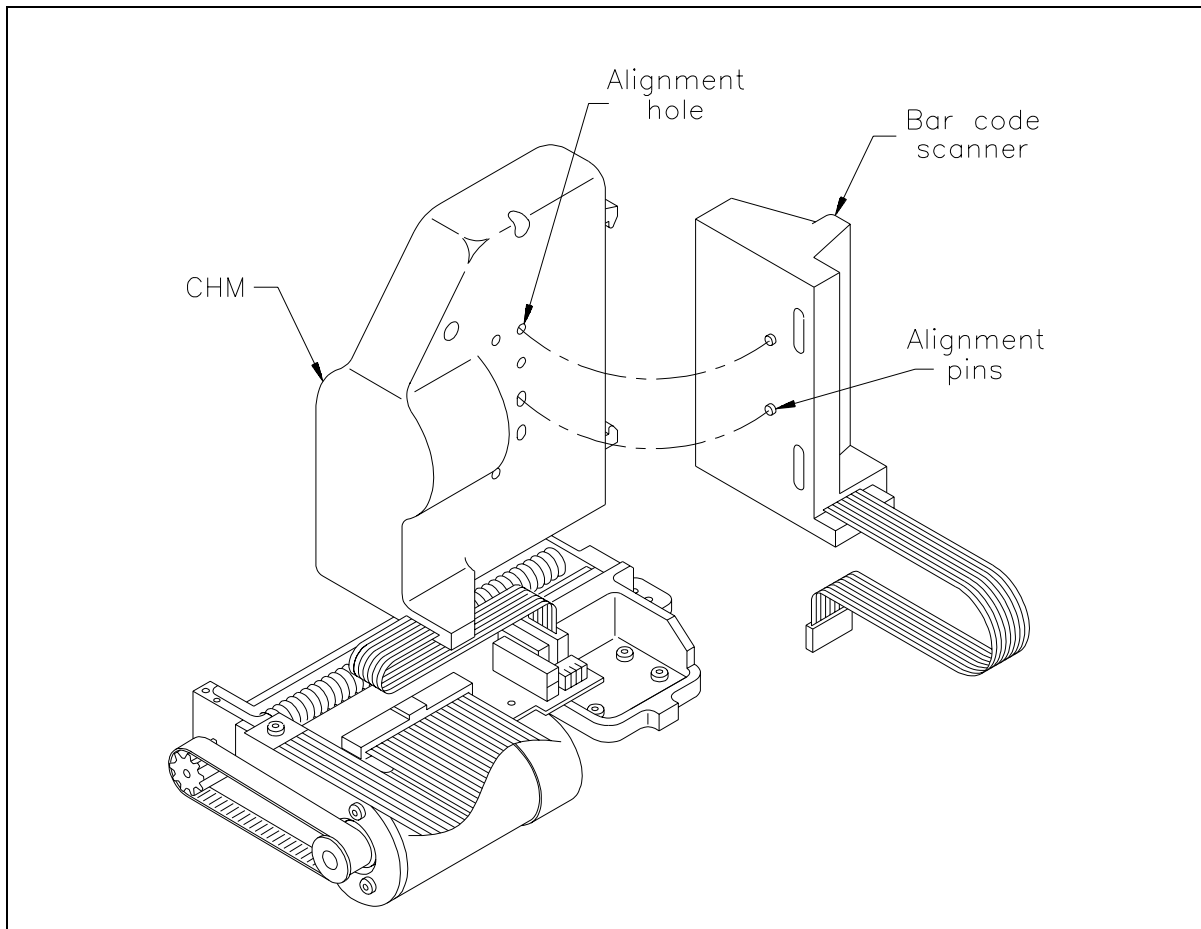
Inserting the bar code scanner alignment pins into the upper alignment holes on the CHM
